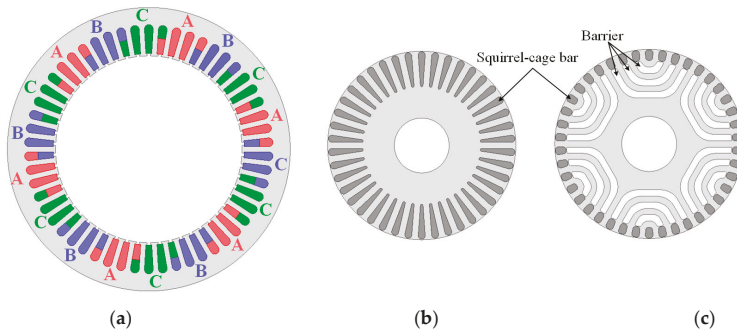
Reference models: (a) stator, (b) rotor of induction motor (IM), (c) rotor of LS-SynRM.
